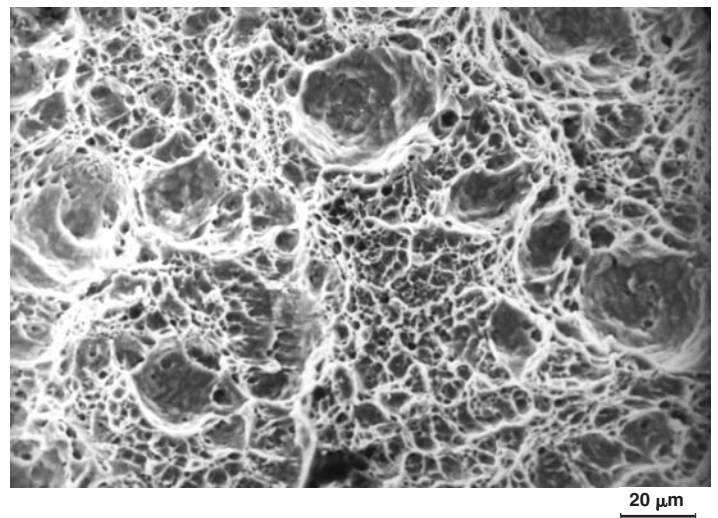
SEM fractograph showing equiaxed dimples in the final fracture region B of Fig. CH24.2
